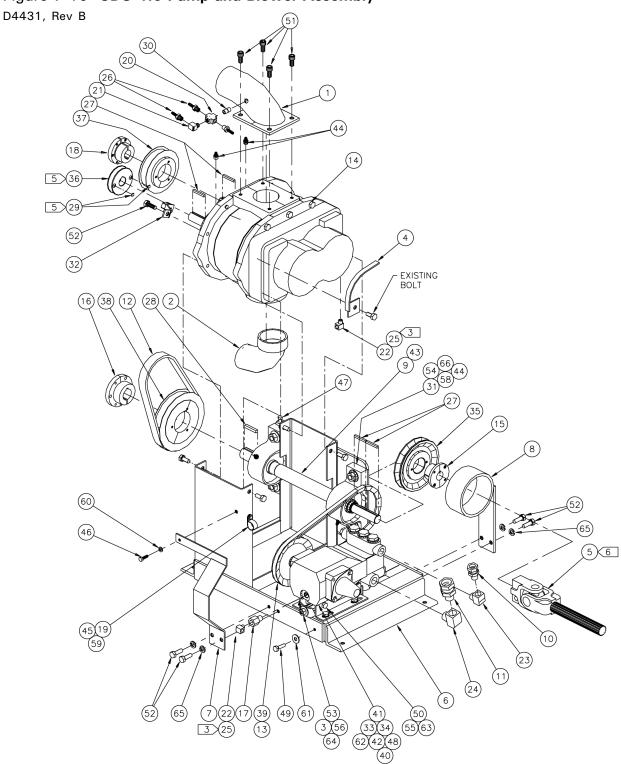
CDS 4.6 Pump and Blower Assembly
